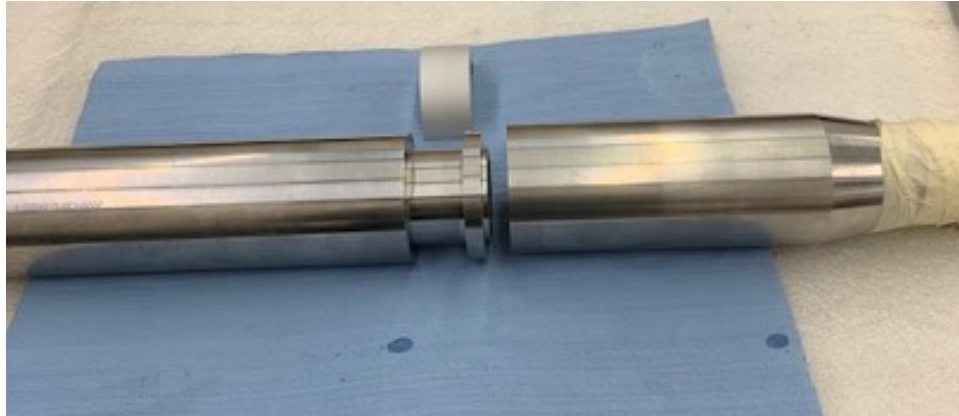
Two pieces of the sting, showing the flange on the aft part of the sting [Source: MM&T].
